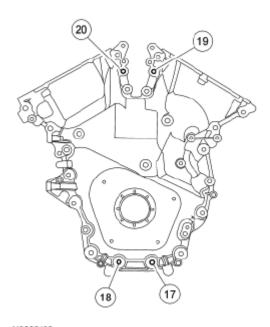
Identifying RTV Silicone Applying Area Courtesy of FORD MOTOR CO.
